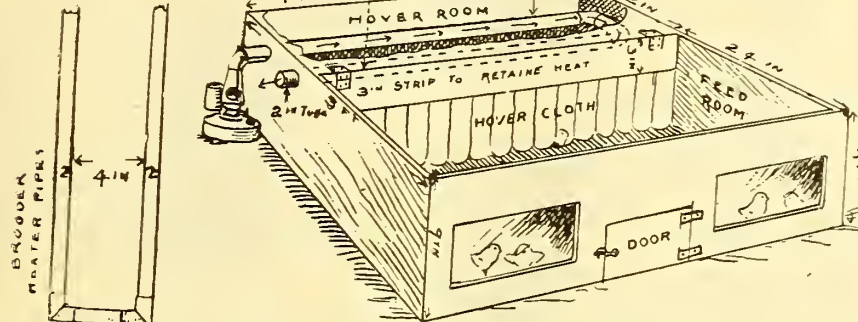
Brooder Plan for Indoor use. Pipes to Fasten one inch from ceiling, six inches from floor inside the hover room.
